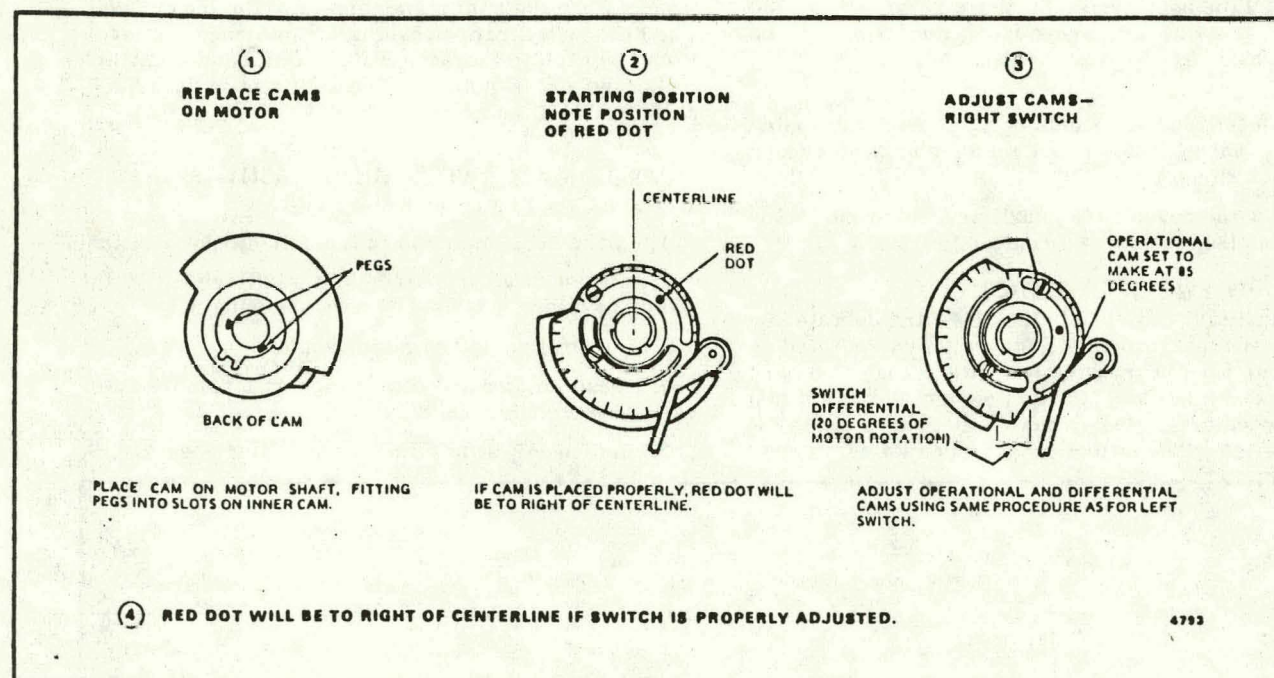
ADJUSTING RIGHT SWITCH MAKE AND BREAK POINTS.
